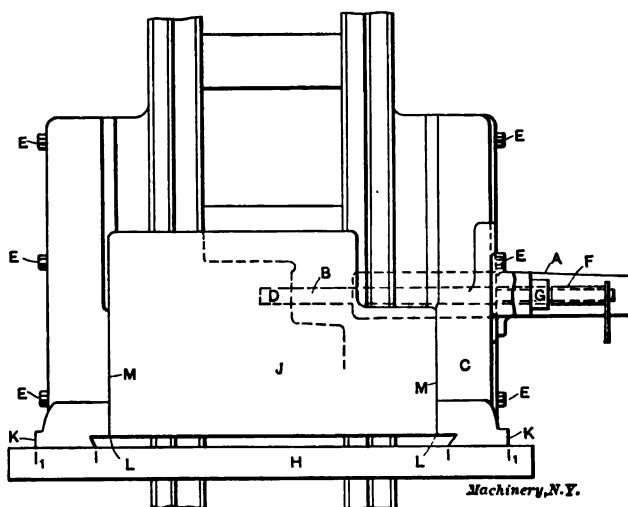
Method of Setting the Housings. First the Front Housing is set for Alignment of Driving Shaft Bracket *A*; then the Back Housing is brought into the Same Plane by means of Straightedge *H
